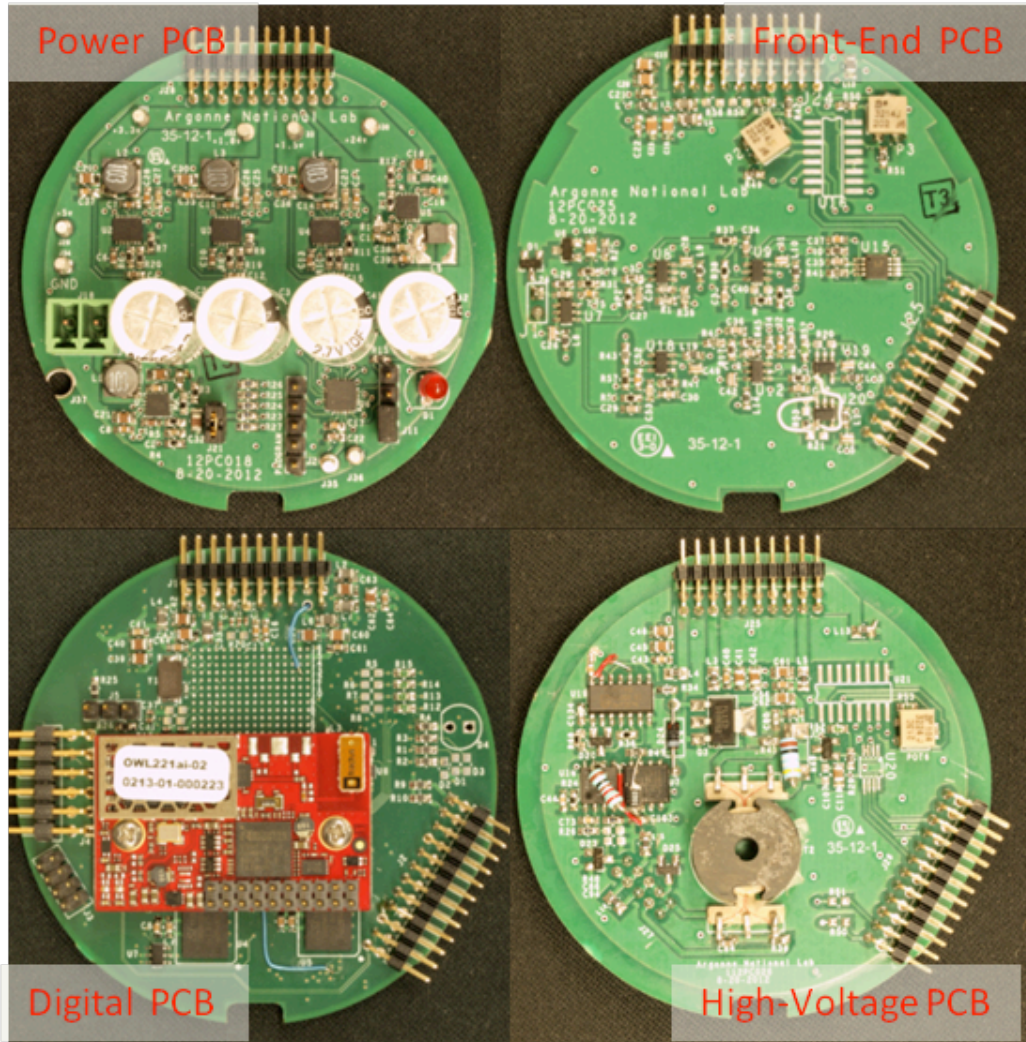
Pictures of the four printed circuit boards in the wireless prototype system. Upper left figure shows the power board, upper right shows the front end, lower left shows the digital and lower right shows the high voltage PCB.
